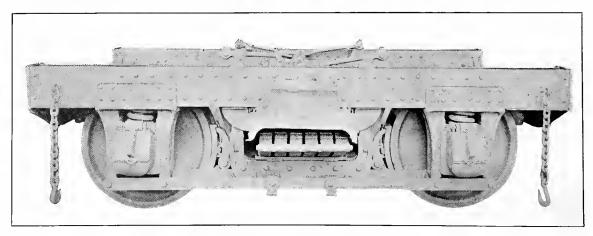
Four-Wheel Truck for Pennsylvania Railroad Steel Cars.
